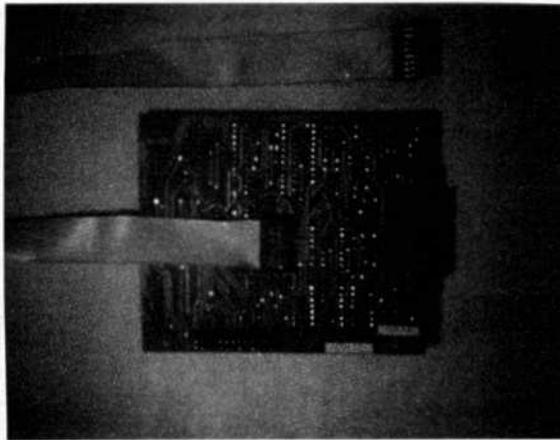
RS-232-C board is removed, showing added wiring to and from remote switches.
